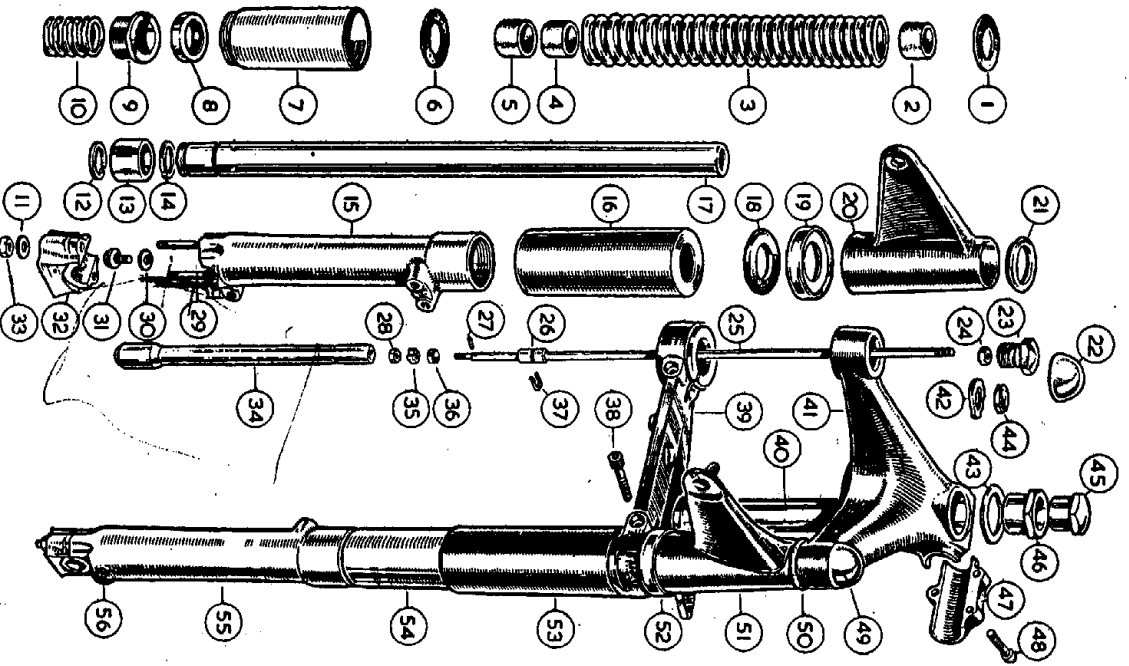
EXPLODED VIEW OF FRONT FORKS FITTED TO 1955 MODELS.
